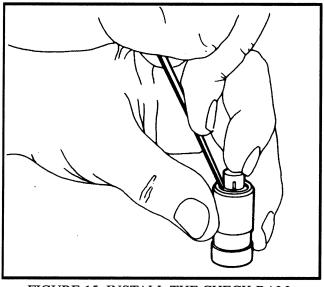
INSTALL THE CHECK BALL ASSEMBLY
